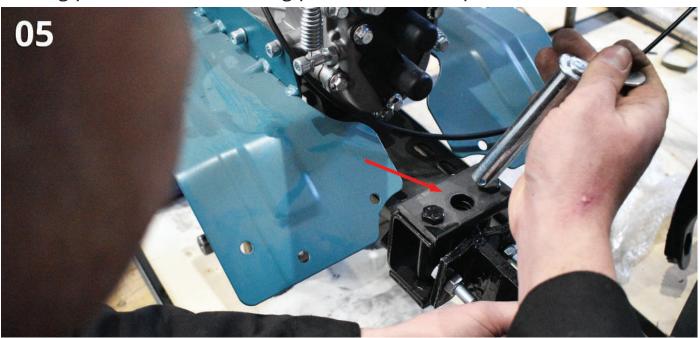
Adjust the angle of rotation of the plow holder mount and fix it with screws. Secure the selected position with a locknut.
